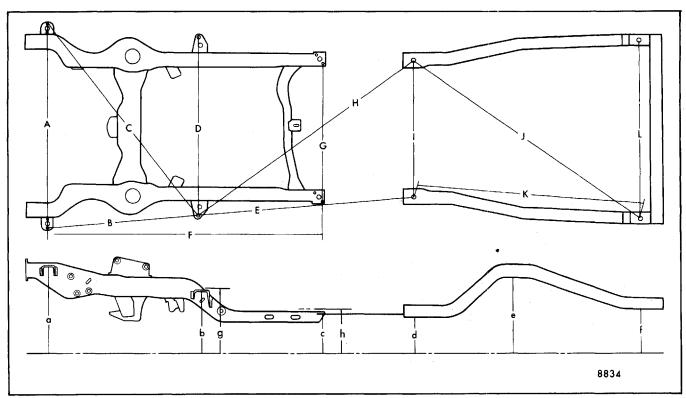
Horizontal and Vertical Checking Dimensions - K Style
